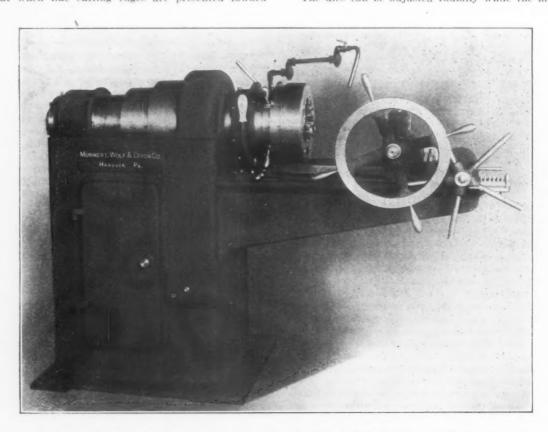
The Plurality-Die Bolt Cutter Built by the Mummert, Wolf & Dixon Company, Hanover, Pa.
